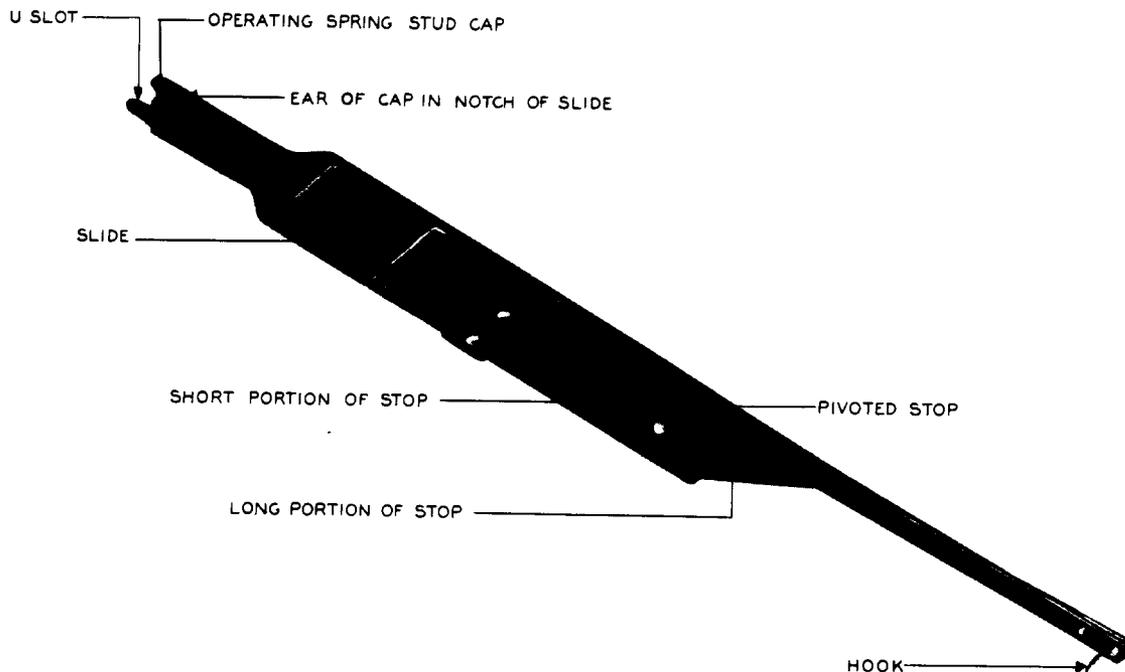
No. 664A Operating Spring Stud Cap Mounting Tool With Cap Held in Tool
